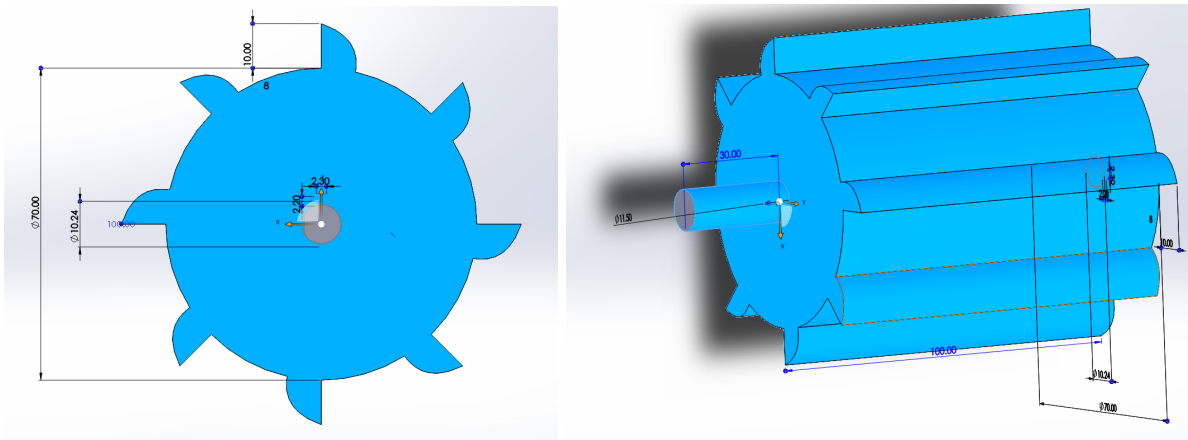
Top Gears connected to Stepper Motor to separate baskets
